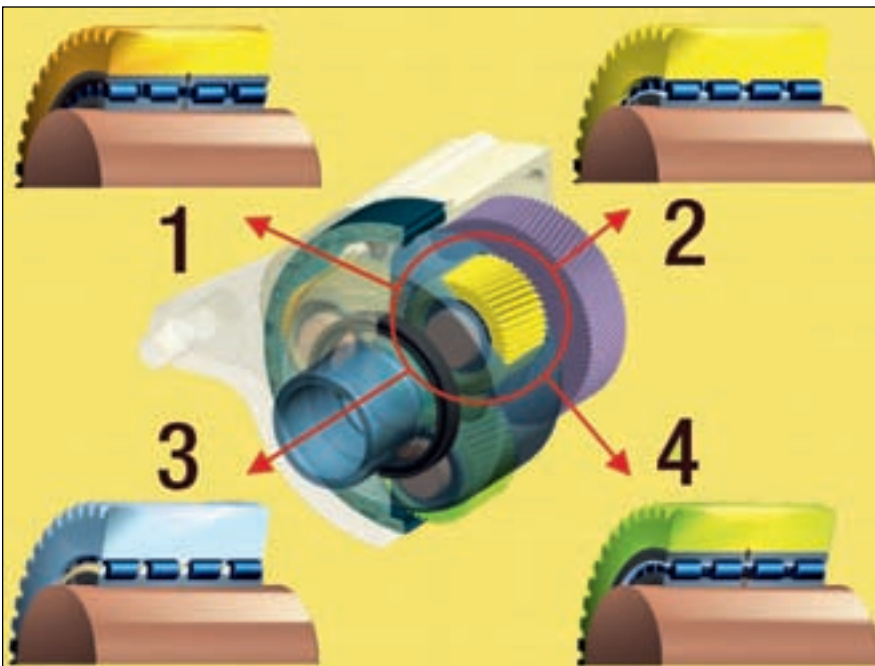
Overview of high-capacity cylindrical roller bearings used in planetary wheels for wind turbine gearboxes. 1) Full-complement cylindrical roller bearing. 2) Integrated high-capacity cylindrical roller bearing with a JB cage. 3) Integrated standard cylindrical roller bearing without outer ring. 4) High-capacity cylindrical roller bearing with a JA cage.
